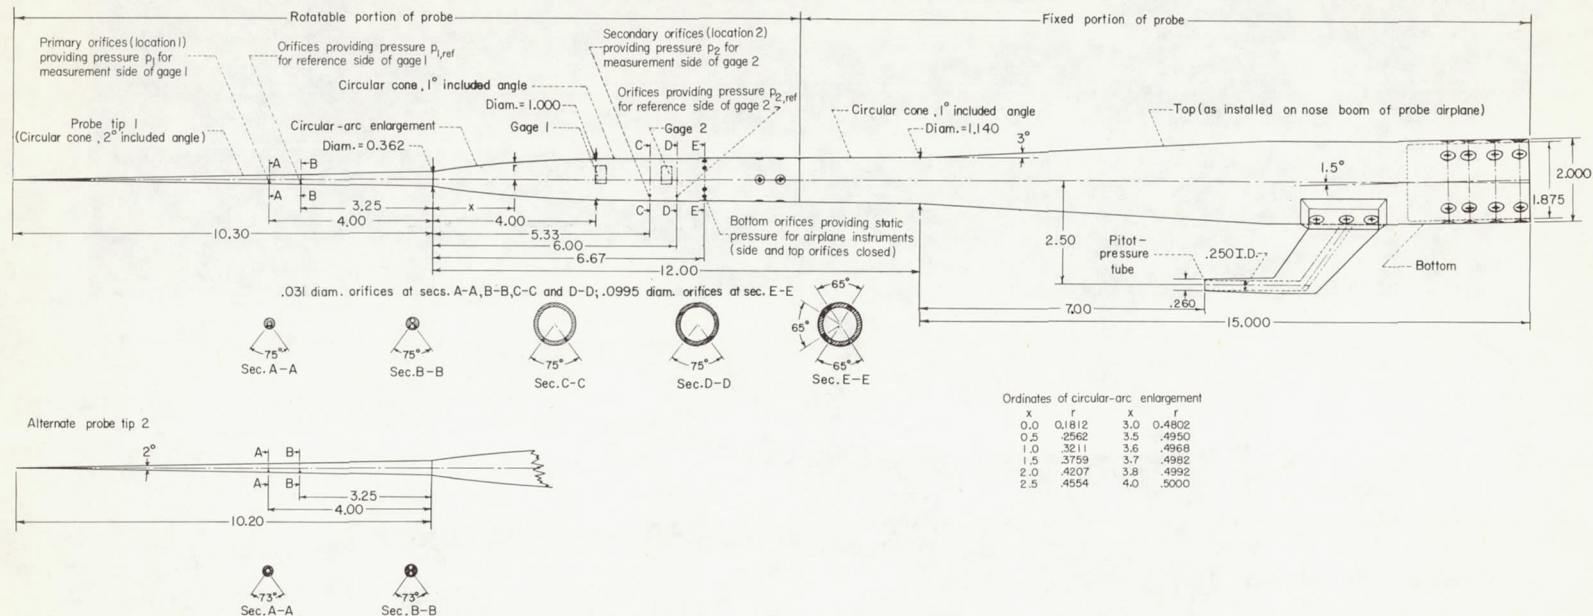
Principal details and dimensions of full-scale probe used for in-flight measurements and for wind-tunnel tests at a Mach number of about 2.01. (Rotatable portion of probe is positioned for probe-airplane flight over generating airplane.) Dimensions are in inches.
